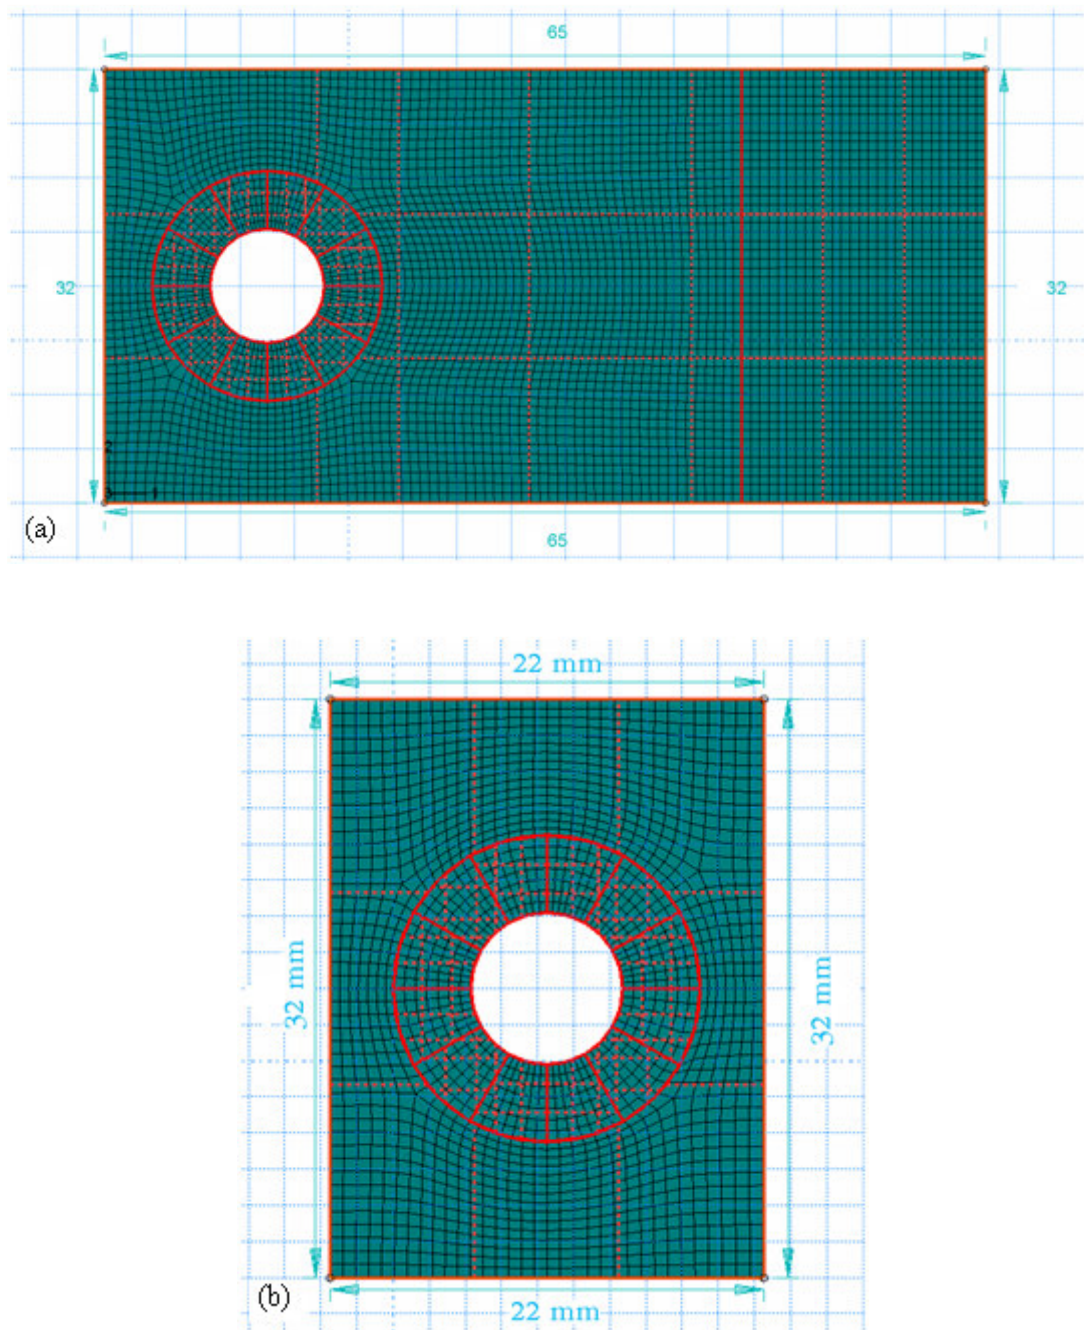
Dimensions of the plate (a) and the frame (b) for configuration 2
